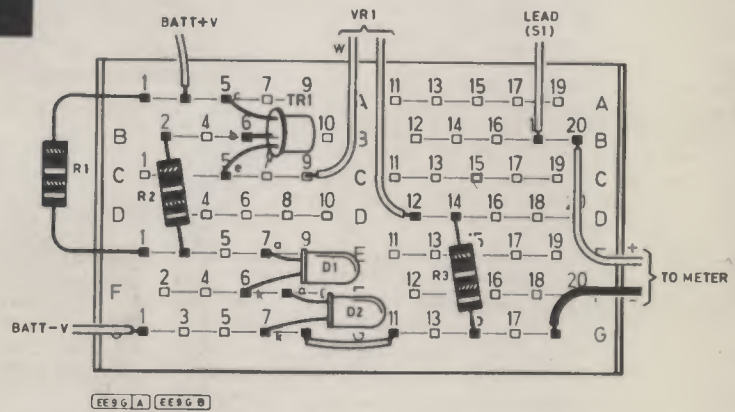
EBBO board layout for Fig. 8.11. The lead marked "W" should connect to the wiper terminal of VR1.
